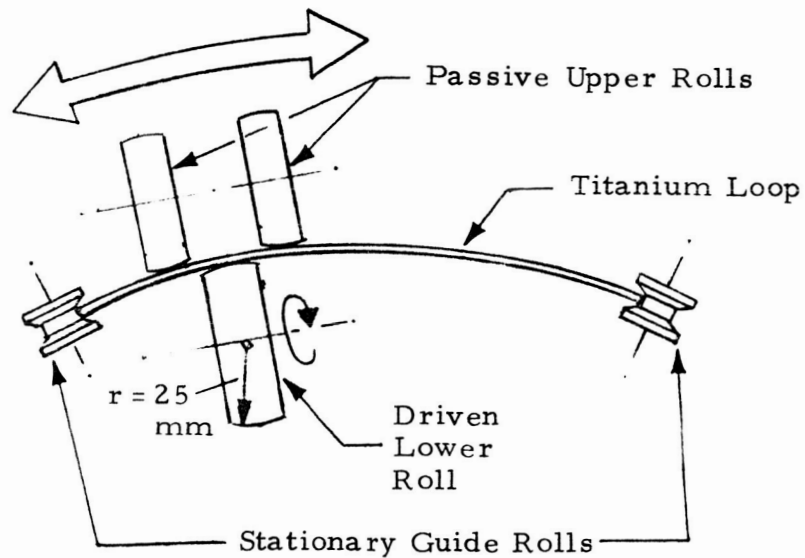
Single-Stand Rollforming Machine to Bend Transverse Curvature into Welded Elastic Loops
